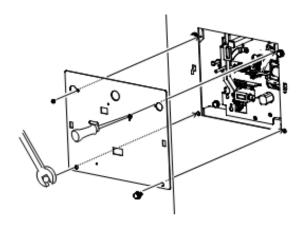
Fix the surface plate to panel with bolts and screw (M8 - 4 bolts and M4 - 2 pan-head screws) removed at work of Fig. 12. The tightening torque should be 11.8 to 14.7 N \cdot m (120 to 150 kgf \cdot cm) (at M8).
